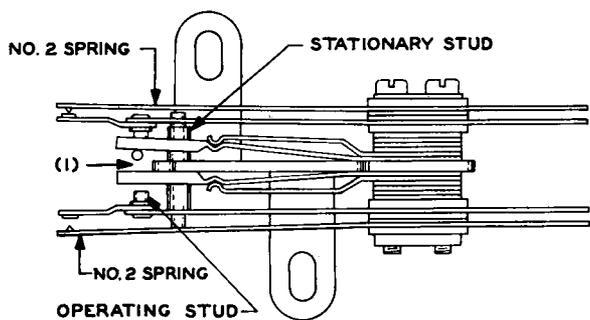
Fig. F — Selecting Off-Normal Spring Assembly With Selecting Unit Operated
